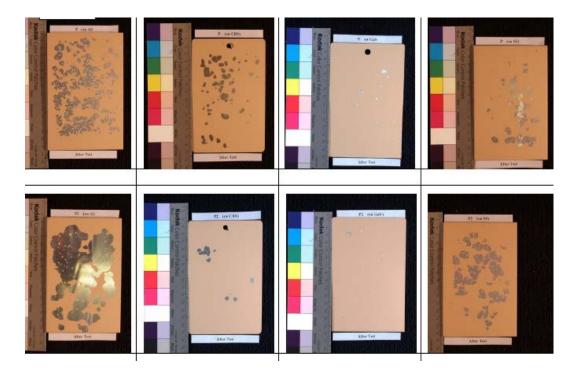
Picklex on (from L to R) aluminum, cold-rolled, galvanized, and stainless steel (53030 top, 53022 bottom)  $\,$
